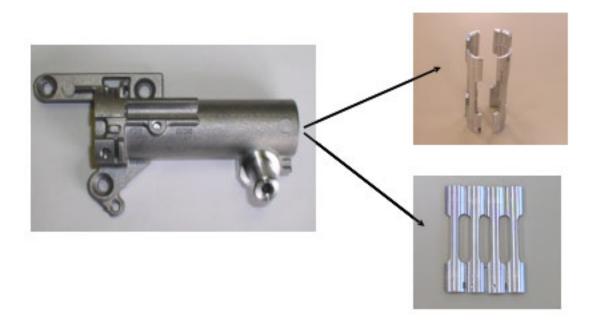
Showing tensile test samples cut from SiBloy® SSM castings.
